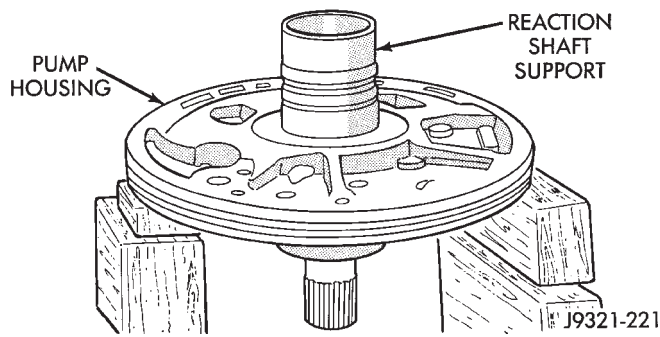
Assembling Reaction Shaft Support And Pump Housing
